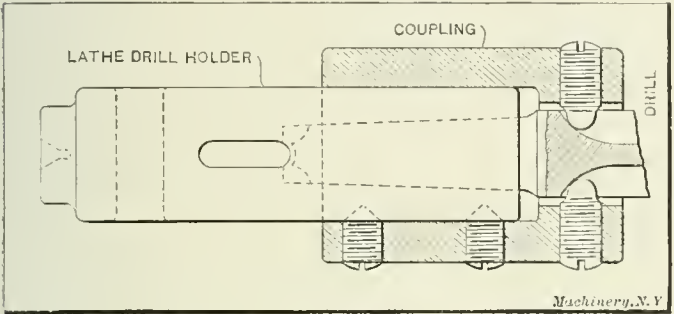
Drill Coupling which may be used when both Tang and Slot are worn out
